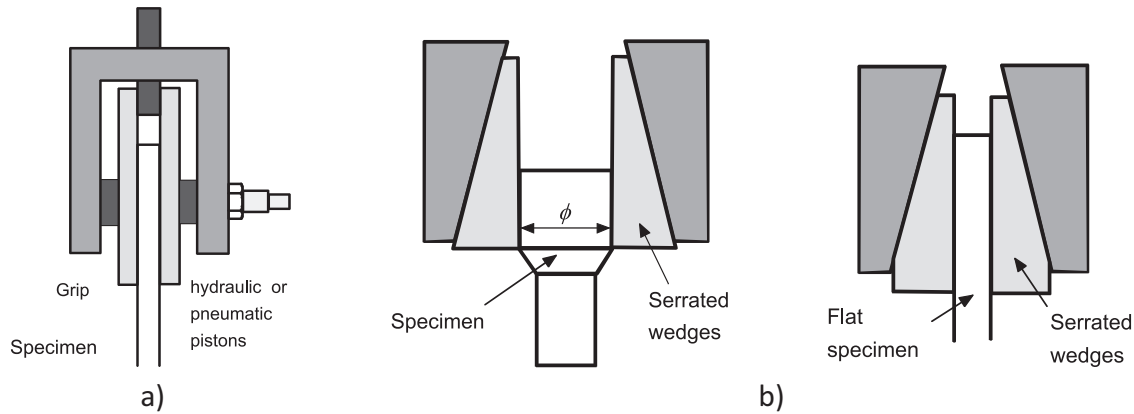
Active clamping jaws: (a) pneumatic or hydraulic, (b) mechanical used for circular and prismatic samples.
